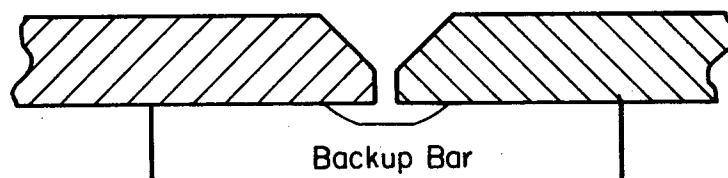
GROOVED BACKUP AS TYPICALLY USED IN GAS TUNGSTEN-ARC WELDING
